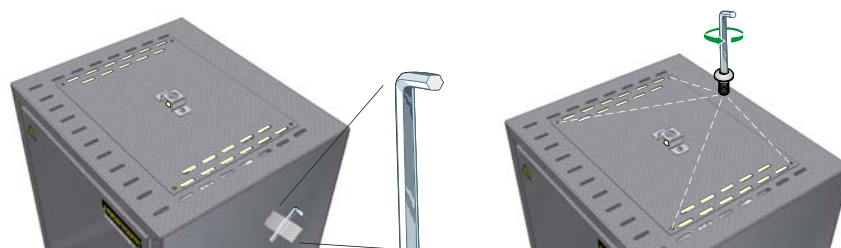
Unscrew the screws from the lid using the tool that is provided.
